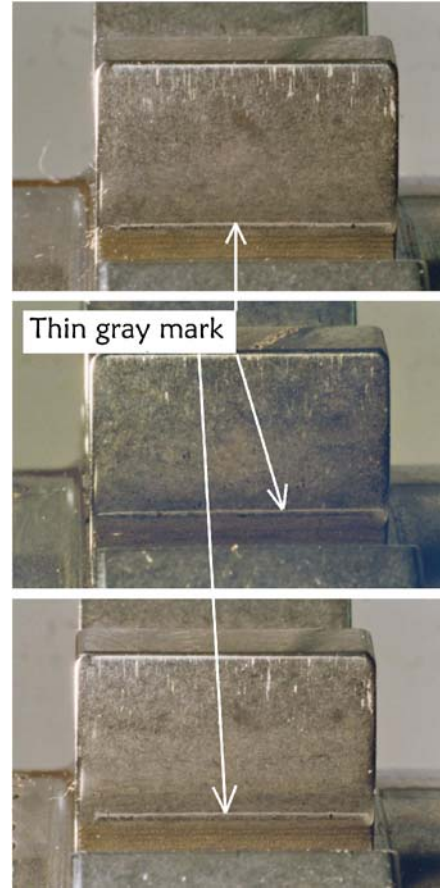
Picture of 3 teeth on the superfinished pinion after test run 2 (load stage test and endurance test) showing a thin gray mark that was attributed to the gears not having any tip relief. The gears show no micropitting
